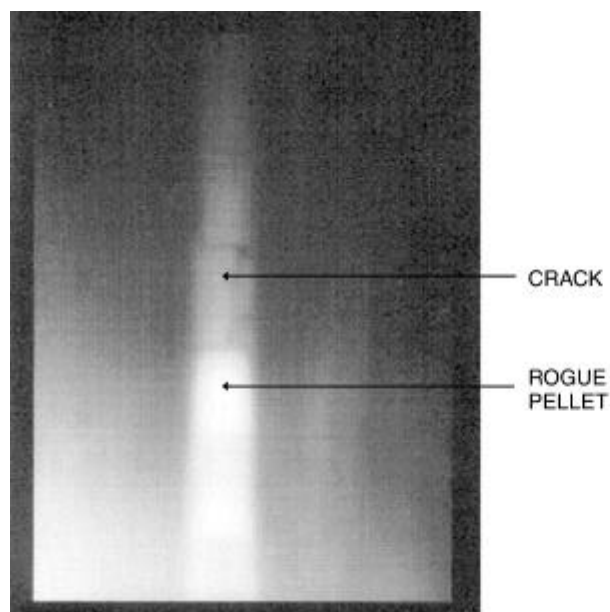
Edge enhanced image of FBTR fuel pin showing cracked and rogue pellets.
